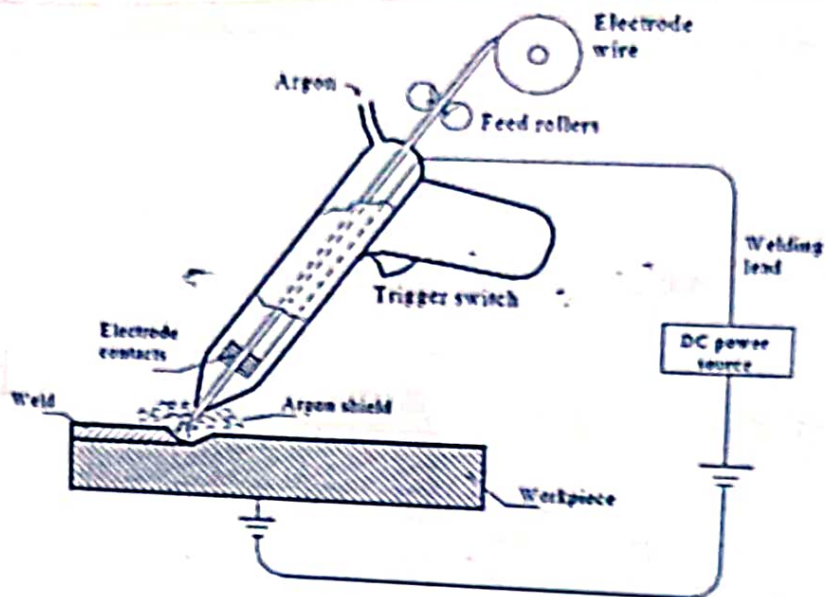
Metal Inert Gas (MIG) Welding
